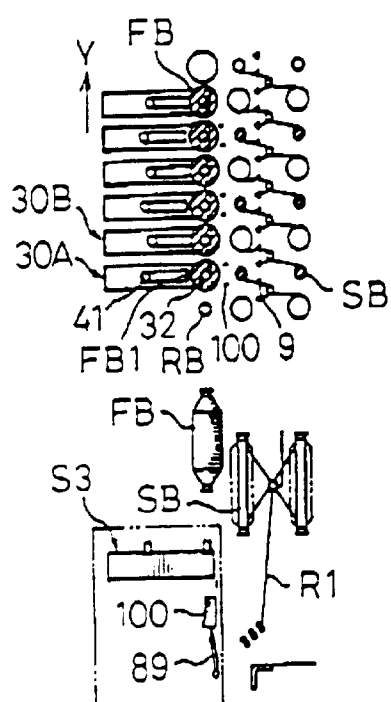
(d) Fig. 28(e) Fig. 28(f)
